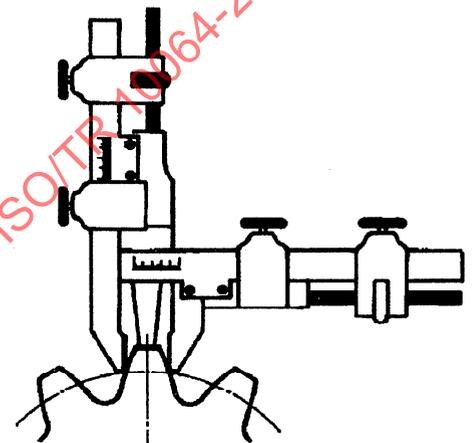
Chordal tooth thickness measurement by gear tooth caliper
